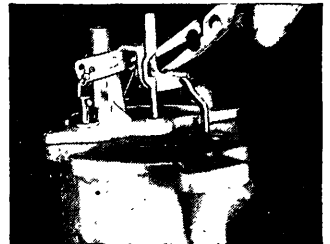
Install metering rod gauge. Hold gauge vertical to insure seating. For carburetors with adjustable metering rod pin, loosen nut on pin and rest pin in notch of gauge and tighten nut (T.I.N. T109-76). For carburetors with fixed pin, bend throttle connector rod so upper end centers freely in pump arm hole
